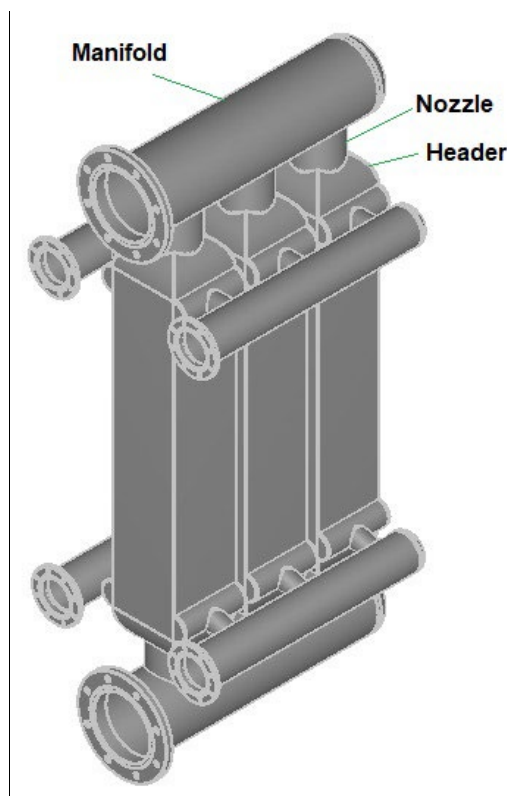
Typical assembly of three brazed aluminium plate-fin heat exchangers in parallel
